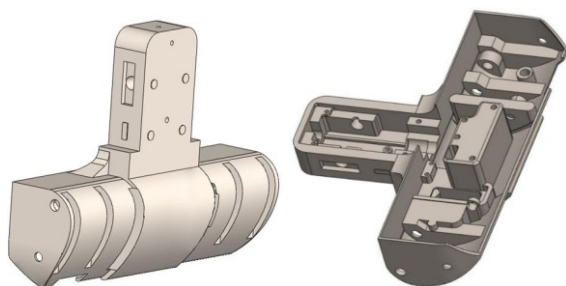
3D Geometric model of the workpiece, developed in SolidWorks, on the both side
